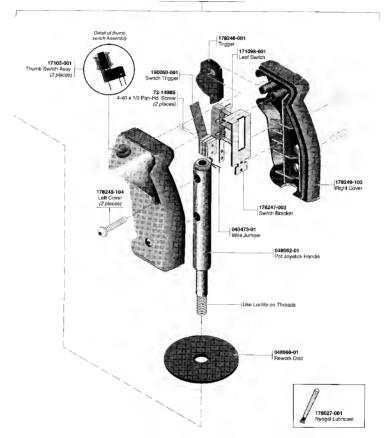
Pot Joystick Assembly, Continued A049009-01 B
